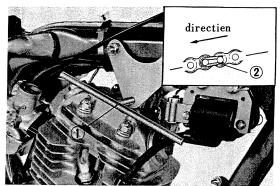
① T-screwdriver ② Retaining clip and master link
